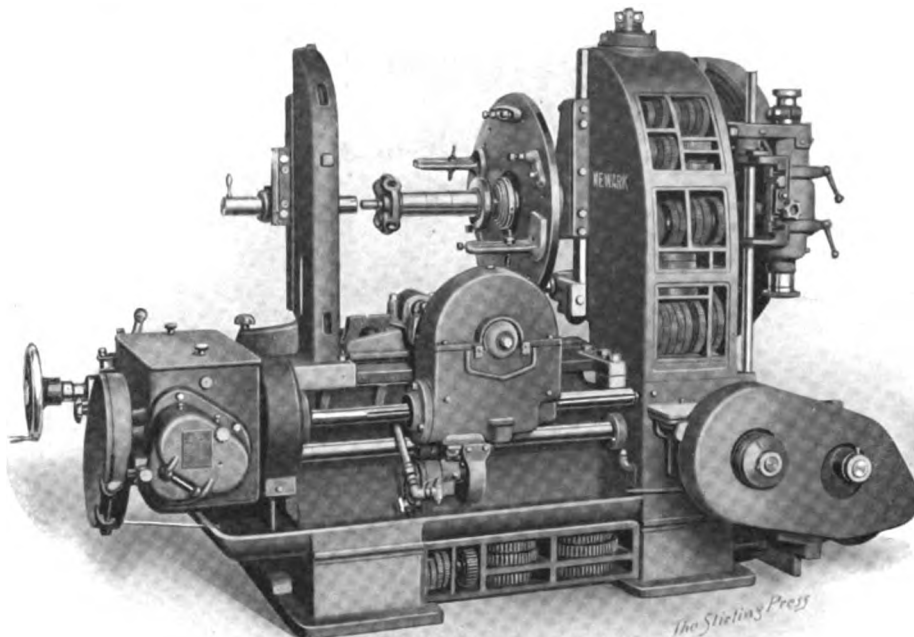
Newark Automatic Spur Gear Cutting Machine
